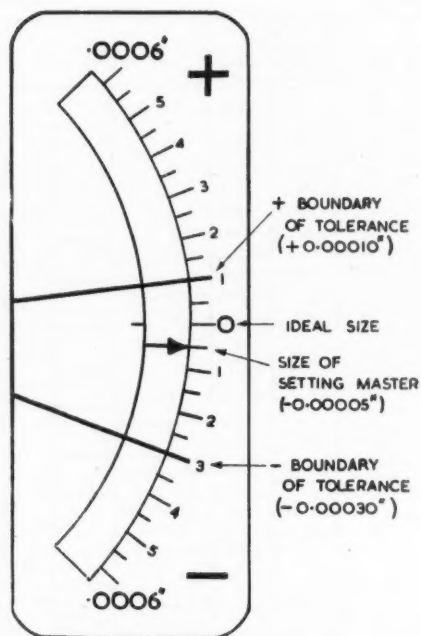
Scale of measuring instrument used to inspect parts described in the Paper.
